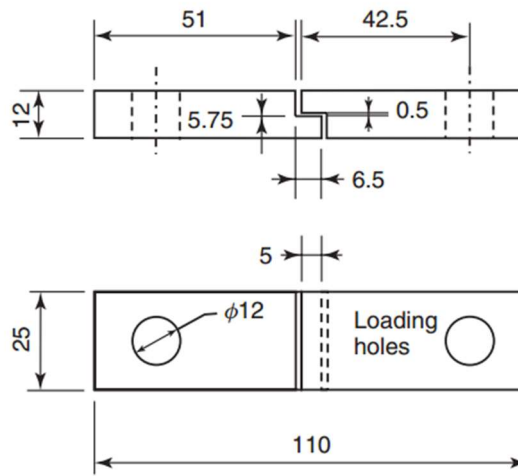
TAST specimen geometry (dimensions in millimetres)
